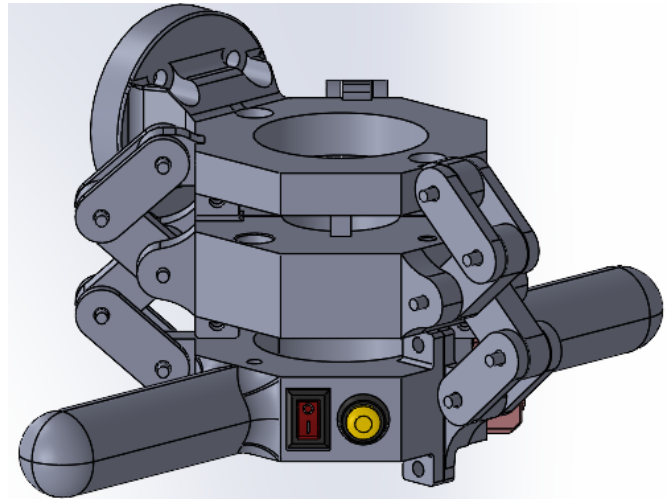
Interface overview: top ring for robot attachment, bottom ring with handles, and Sarrus mechanism ensuring motion between the rings is constrained to the z-axis only. The three rings feature a central tool mount (e.g., polishing machine). Integrated buttons (left: switch/push; right: scroll wheel/push) that allow for operator control.
